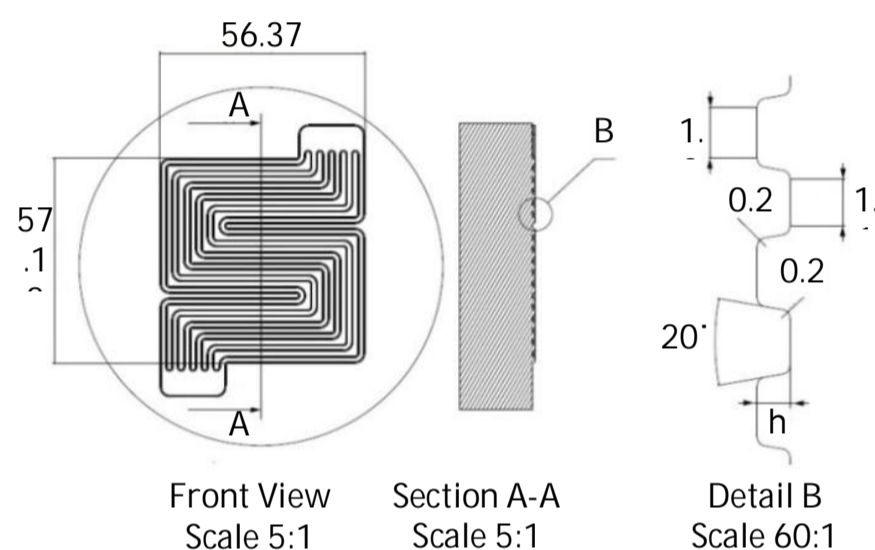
The frame of parallel worming grooves of a bipolar plate and its geometric dimensions (mm)
